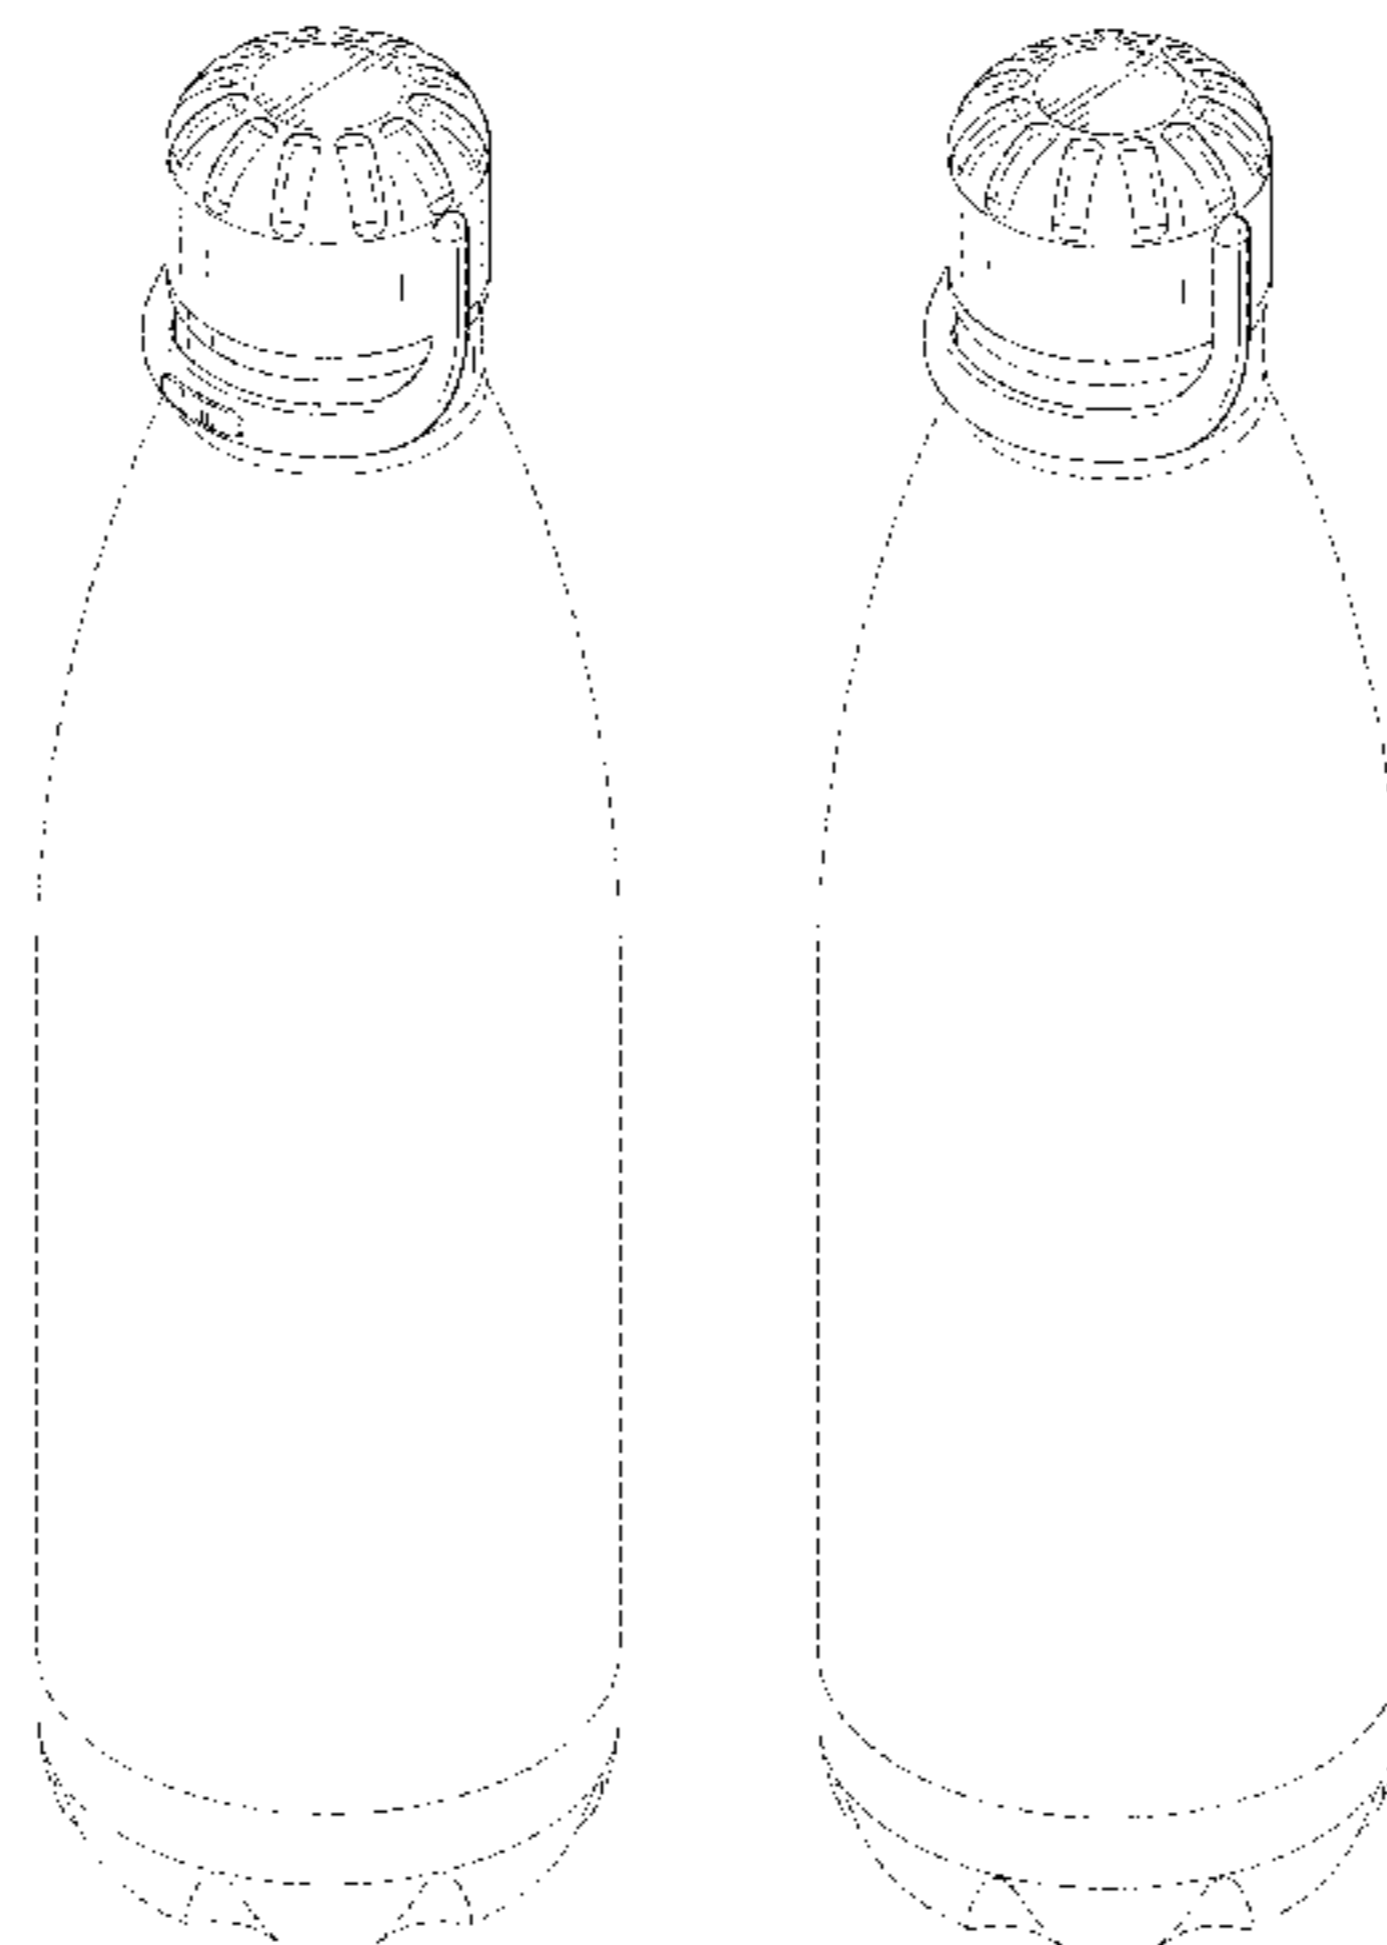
is a perspective view of a third embodiment of a bottle cap with an L-shape handle;
